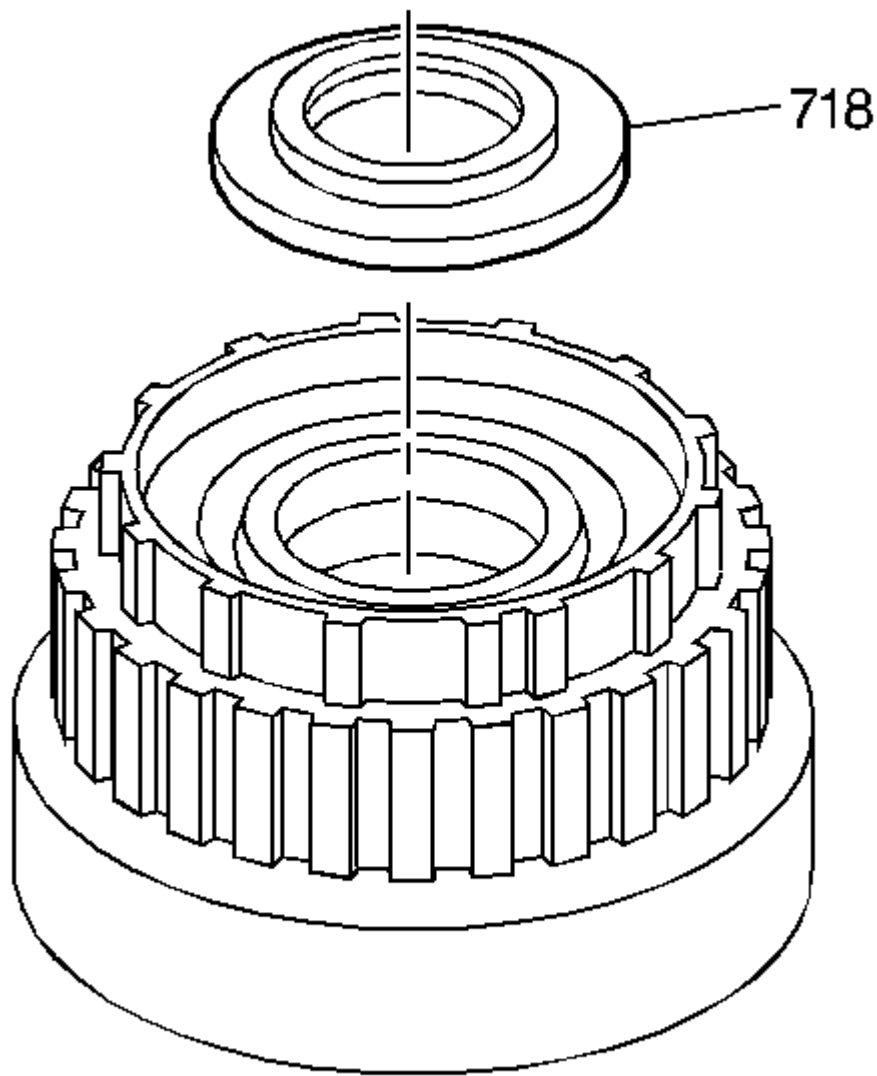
Installing Thrust Bearing On Coast Clutch Hub
